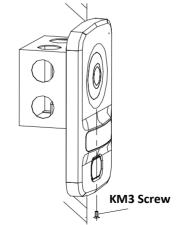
Secure the Door Station (DS-KV8102-XP)
